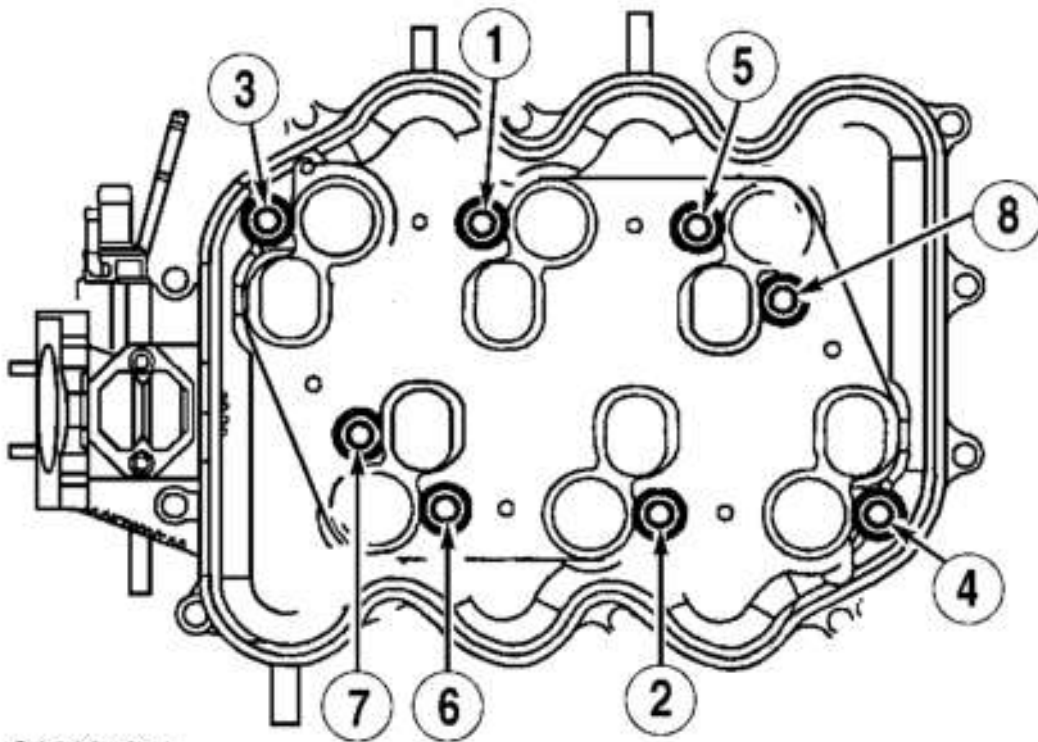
Intake Manifold Spacer Assembly Bolt Tightening Sequence (Pickup & Van - 2001)
